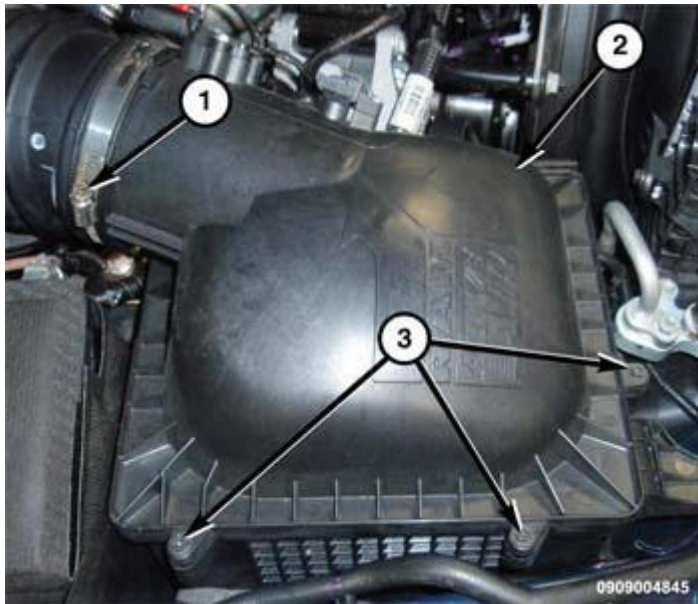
Identifying Clamp, Air Cleaner Cover & Screws
